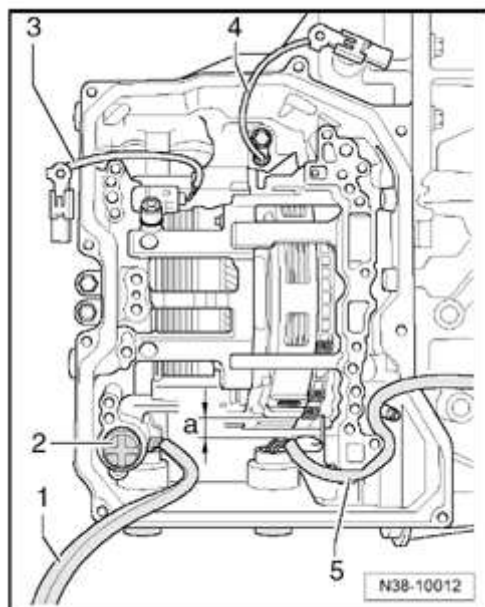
Valve Body Wiring Harness And Damping Plunger
